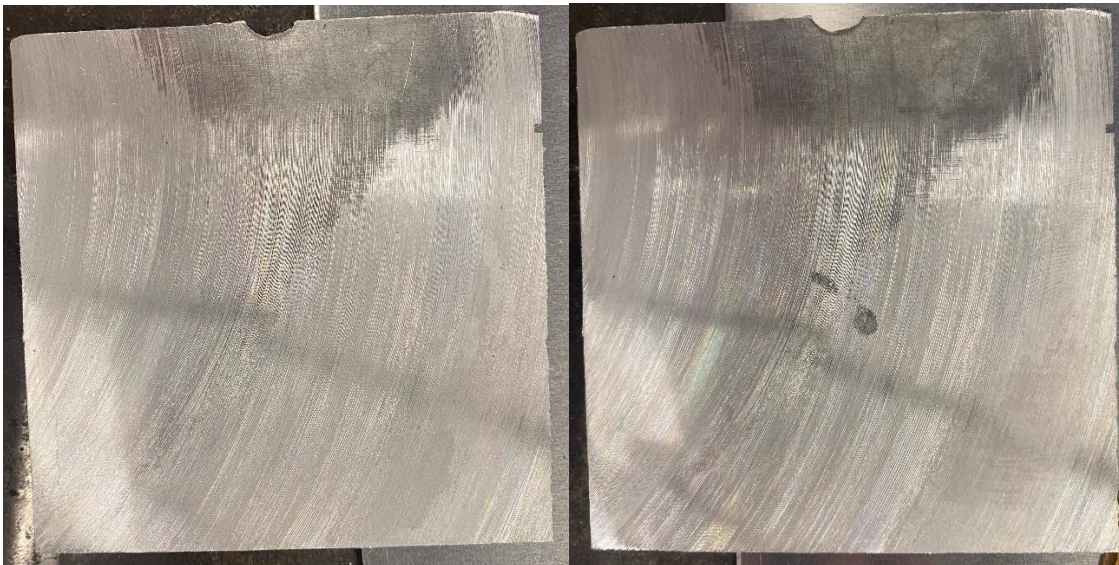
Thick Aluminum Sample Before Impact and After Impact
